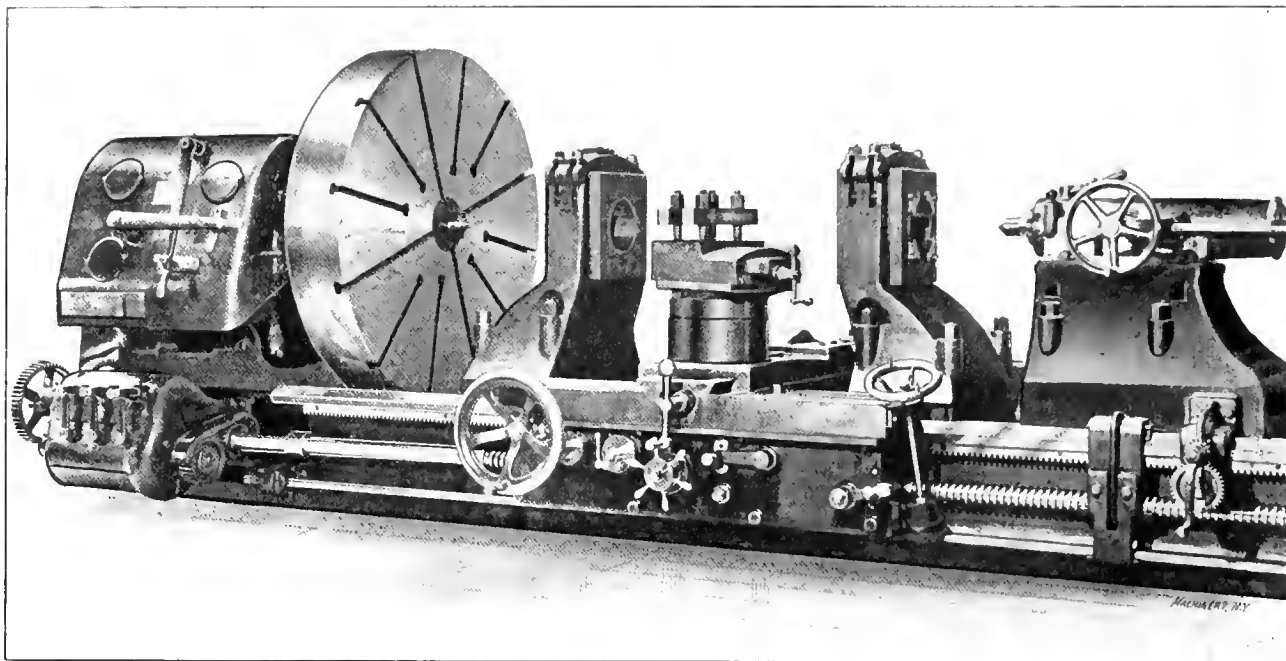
American Tool Works Company's Sixty-inch Roll Turning Laths.
